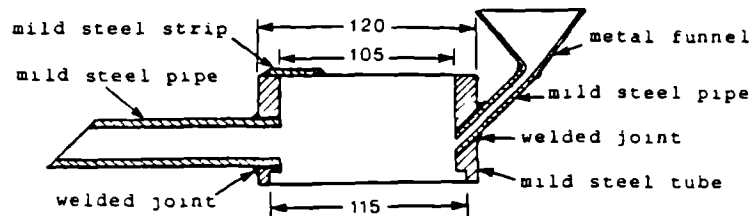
Lead pouring assembly after machining and welding the components together.
